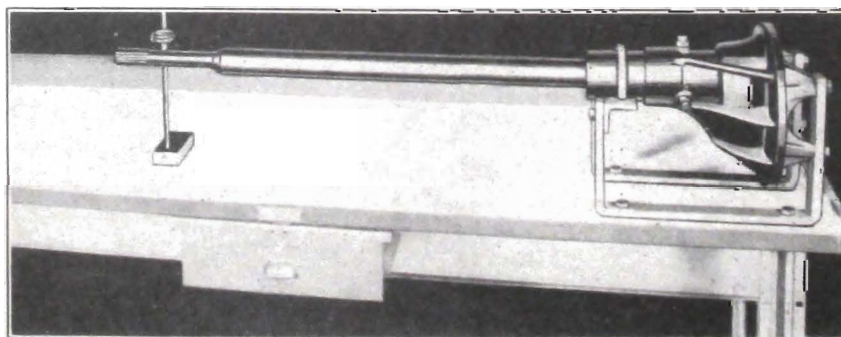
Pinion and Propeller Shaft Straightening Fixture
